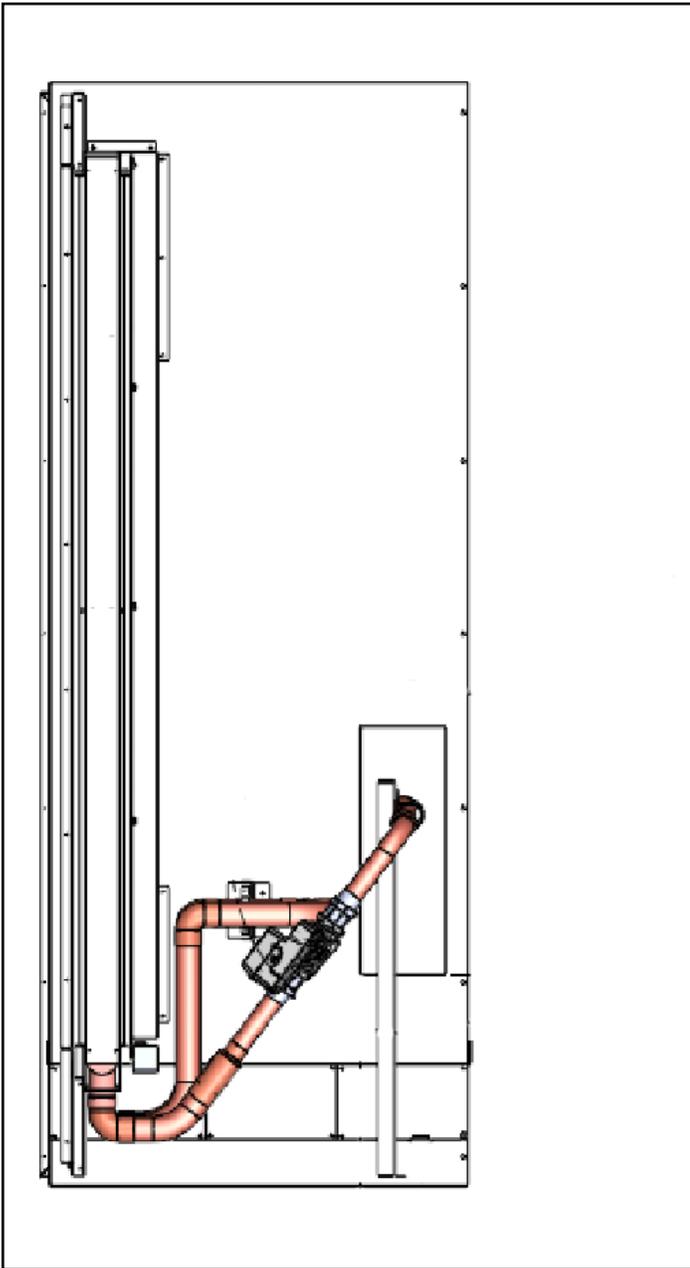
B-Cabinet Steam Heat Section (Valve and Factory Piping)
